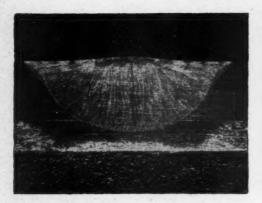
Photomicrograph of a cross-section of a spot-weld between three metal sheets made by the inert-gas tungsten-arc process
